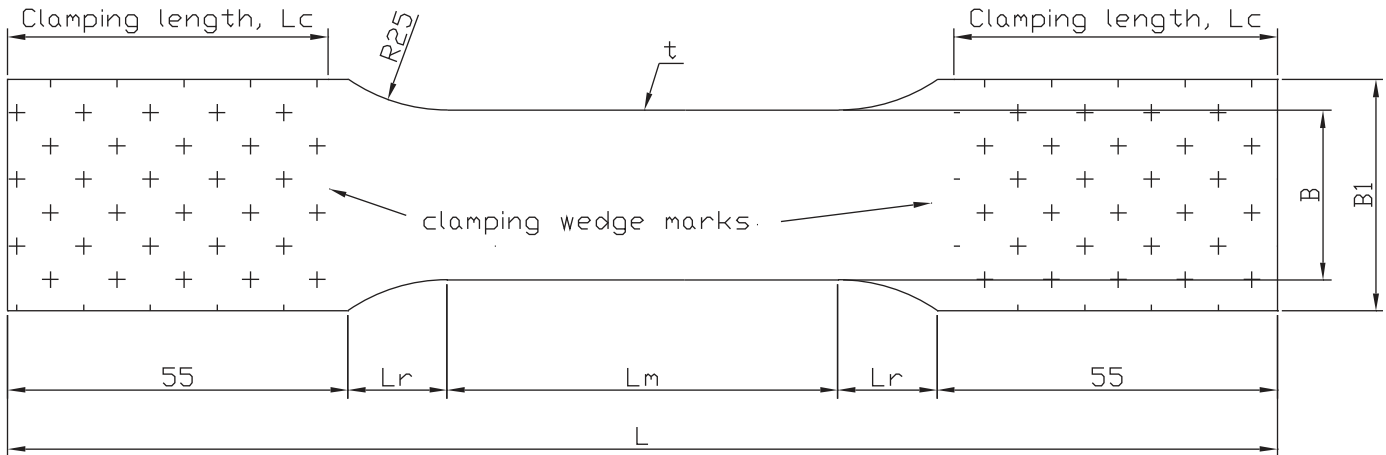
Principal dimensions of dog-bone type tensile specimen.
